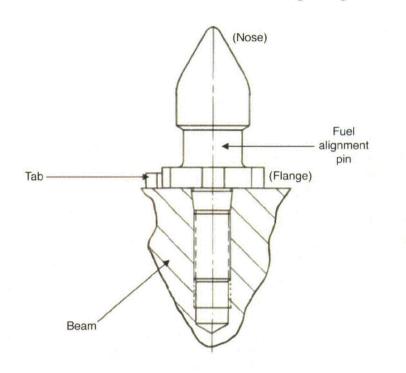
Cross-Section of the CE System 80 Fuel Alignment Pin (threaded and pre-loaded) in the Beam with Locking Tab
